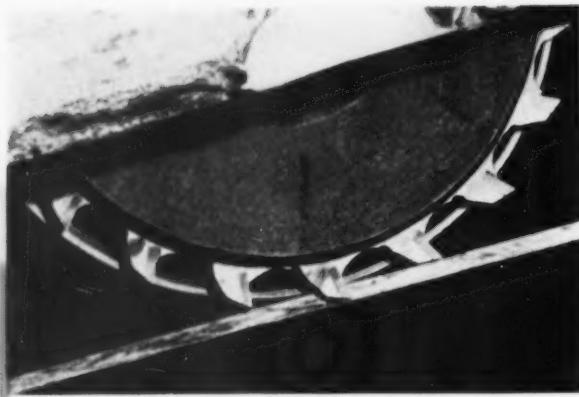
Close-up of trimmer saw, side view showing cutter.
